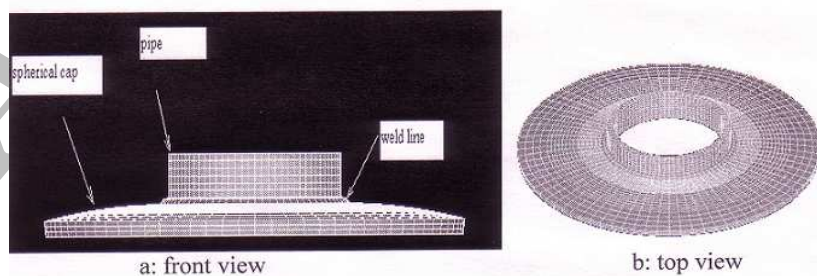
Finite element mesh of pipe, spherical cap and weld bead
